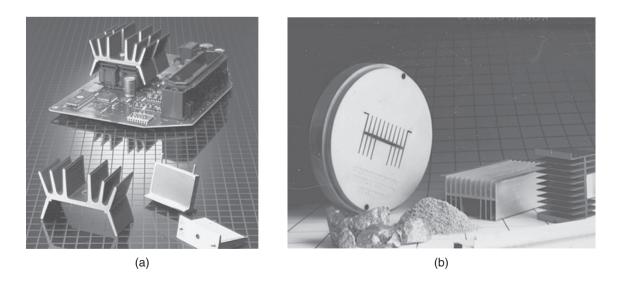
(a) Aluminum extrusion used as a heat sink for a printed circuit board, (b) extrusion die and extruded heat sinks. *Source:* Courtesy of Aluminum Extruders Council.
